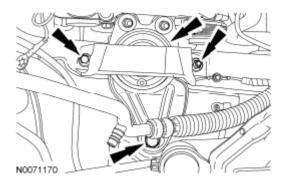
Locating Engine Mount Nuts Courtesy of FORD MOTOR CO.
